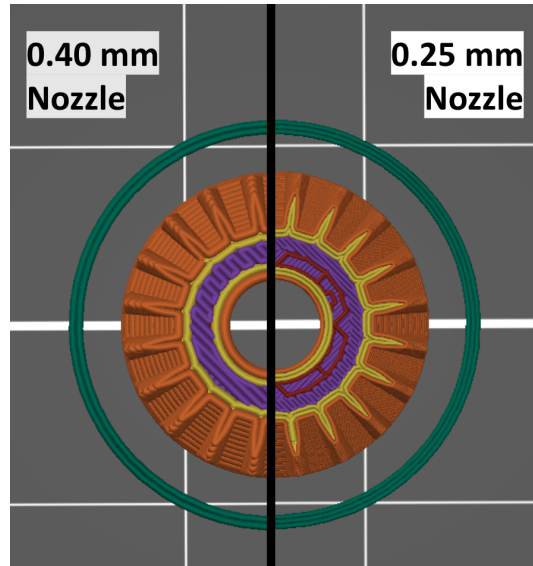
Gears sliced with 0.4 mm (left) vs 0.25 mm (right) nozzle
